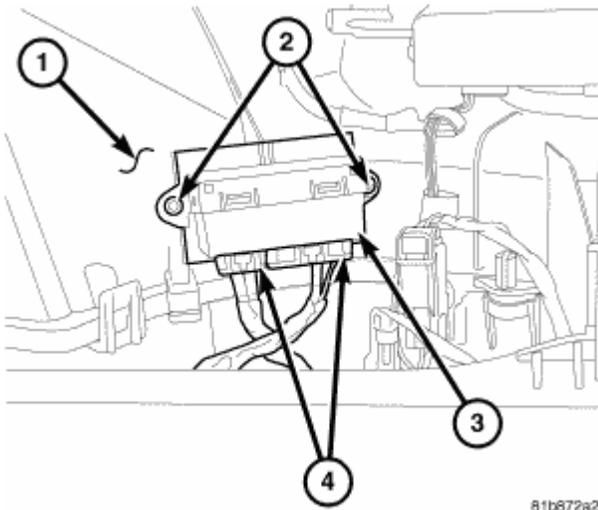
HVAC Housing, Screws, Blower Motor Power Module & Wire Harness Connectors
